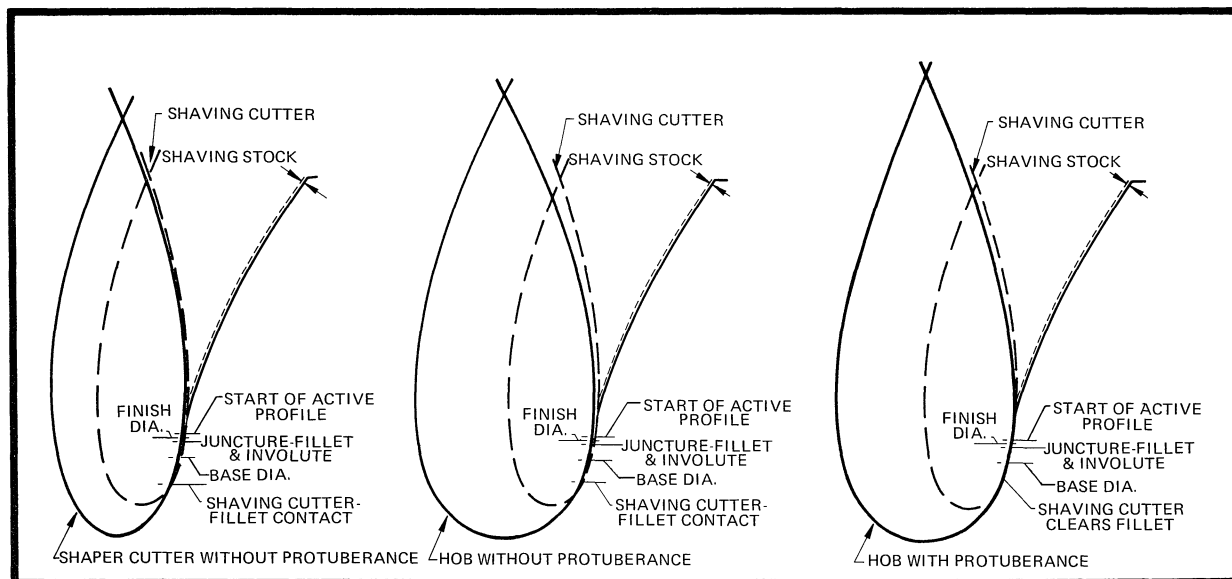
Generating paths of shaper cutter, hobs and rotary-shaving cutters in fillet area on same tooth.
